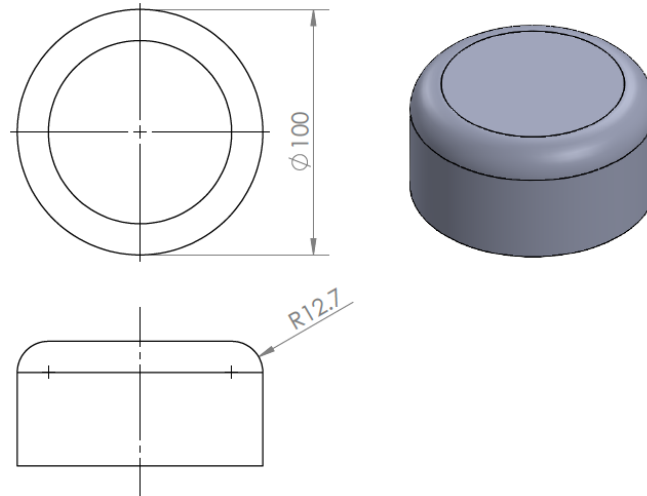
Marciniak punch geometry. The shoulder is tangent on both sides and has a nominal radius of 12.7 mm. All dimensions are in millimeters.
